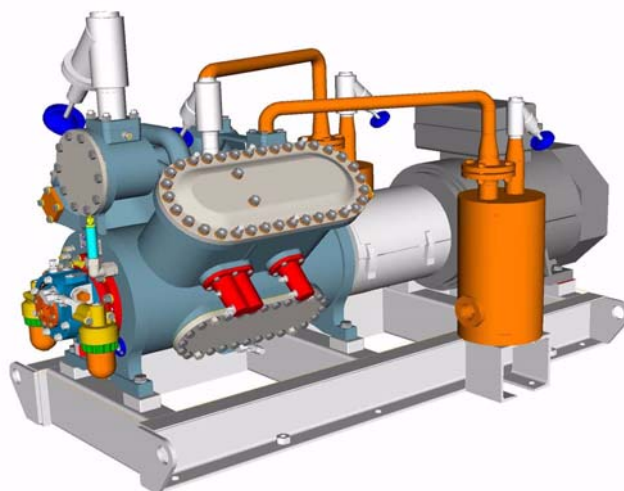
Grasso 10 package, direct drive with oil separator
